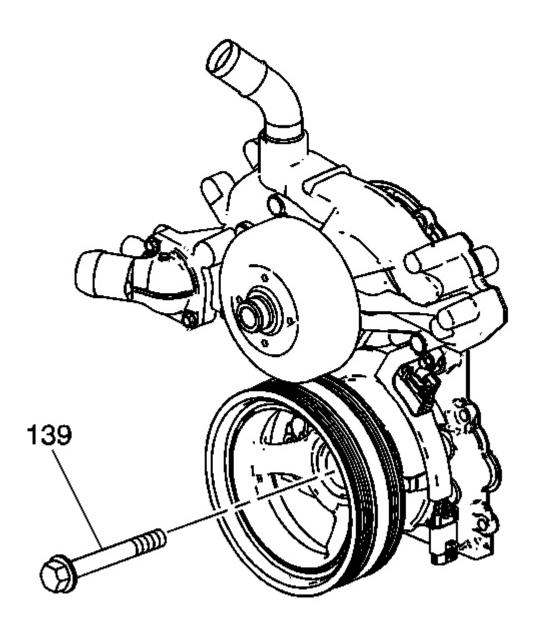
Crankshaft Balancer Bolt Courtesy of GENERAL MOTORS CORP.
